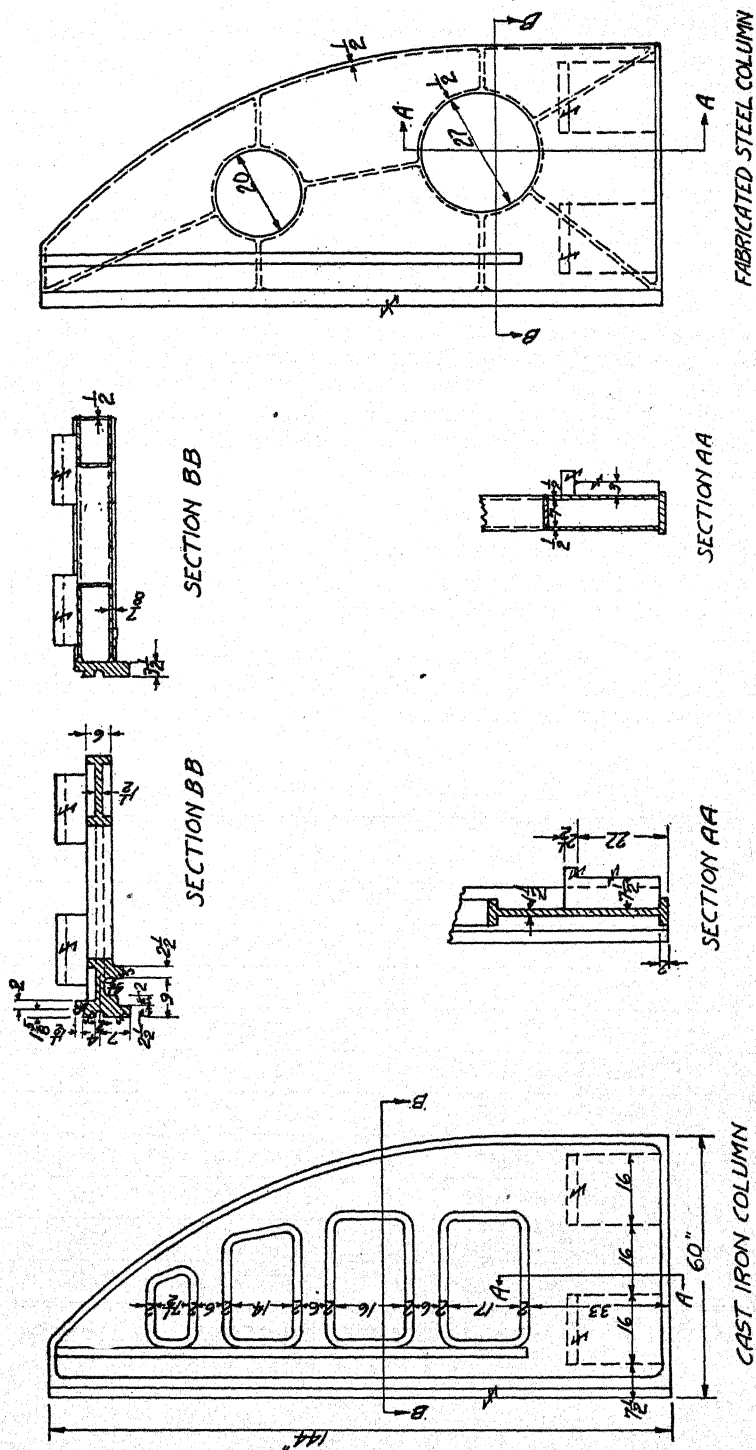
Details of housing in cast iron and welded steel.
